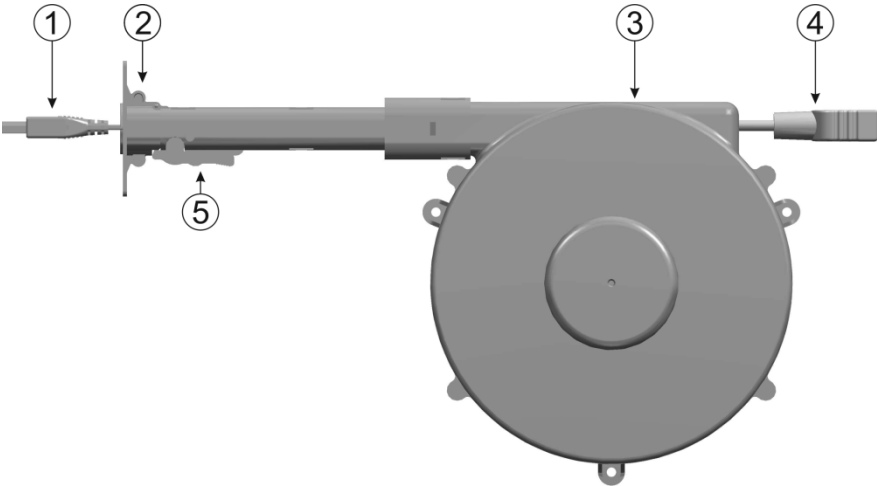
K-Able/XL Box Cable Retractor Front Panel
